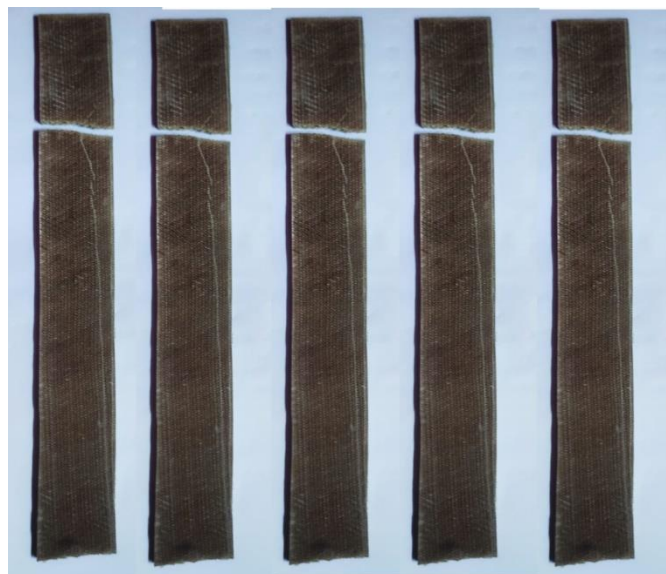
Specimen after Tensile test (ASTM D3039)
